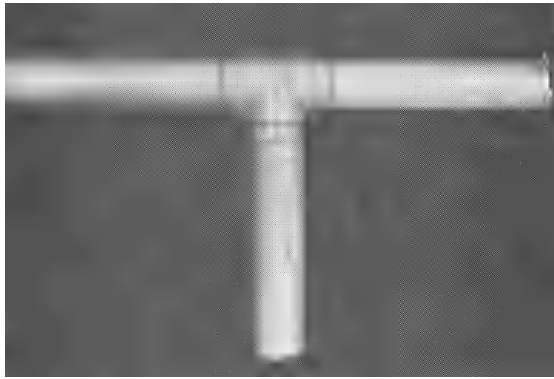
Polypropylene T-joint butt-welded to three pipe sections; the T-joint was injection molded in two identical halves subsequently welded.
